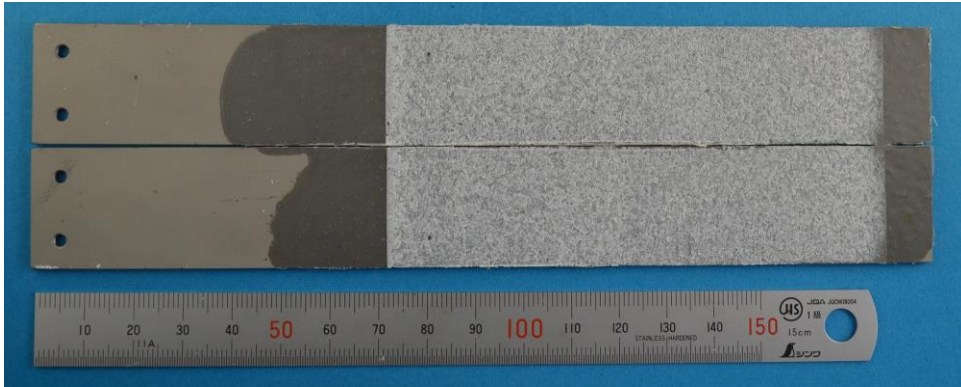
Fracture surfaces for the DCB test specimen with the SGA adhesive.
